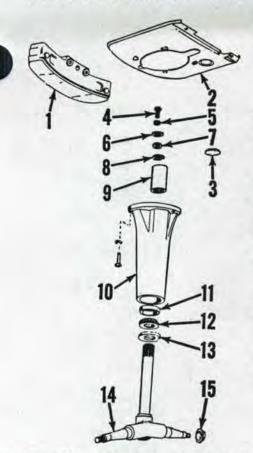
Exploded view of dual wheel pedestal and associated parts.
